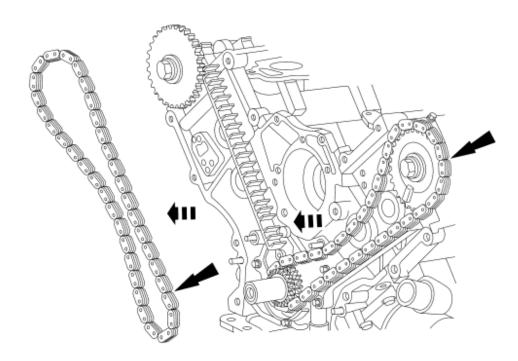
View Of Left And Right Timing Chains, Sprockets And Crankshaft Gear Courtesy of FORD MOTOR CO.
